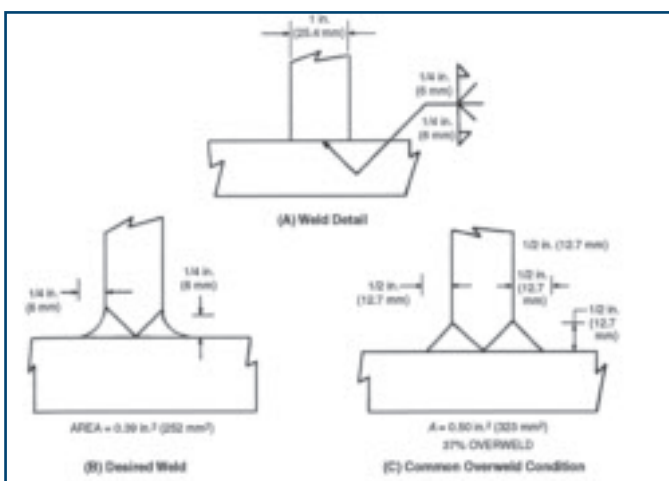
Common overwelded complete penetration T-joint fabricated in the horizontal position: A — Weld detail; B — desired weld; and C — common overweld condition.
